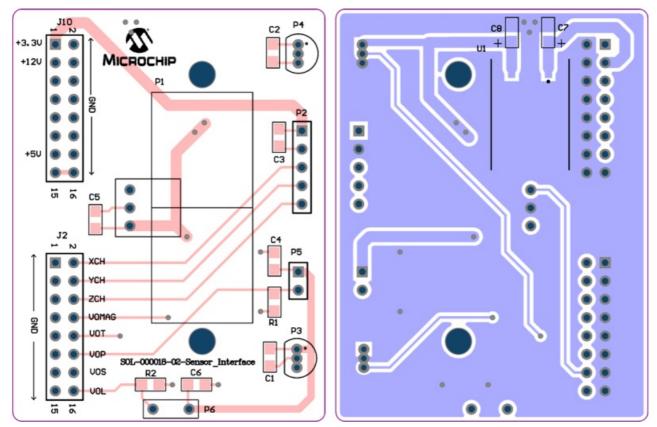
PCB top layer and top components, bottom layer and bottom components (bottom view)
